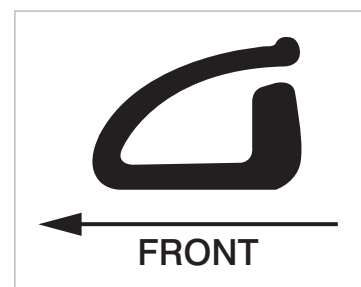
& Diagram: The narrow edge of the cowl weatherstripping faces to the front of the car while the open side faces to the rear.
